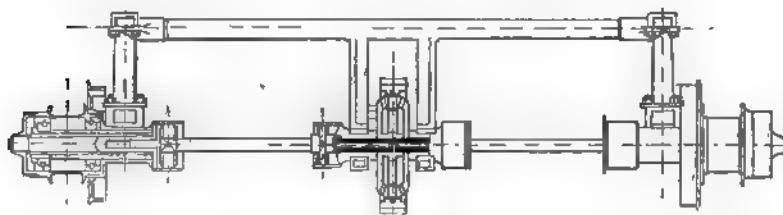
JOINTED REAR-AXLE OF THE DE DION & BOUTON CARRIAGES. By the use of universal joints between the driving spur and wheel spindles a steady drive may be maintained between the spur, hung on the body, above the springs, and the wheels, below the springs, even on the roughest roads, when the springs are constantly in action.
